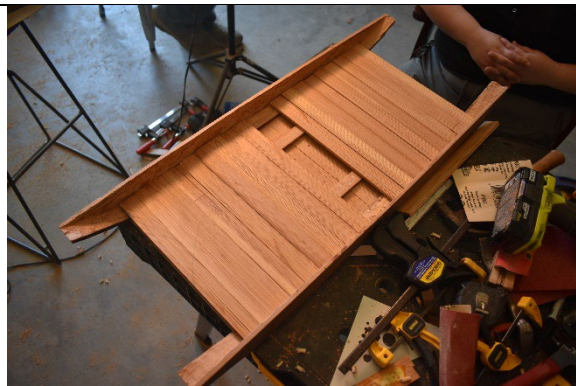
Interior planks being laid into flatboat, resting on chine-girder shelves and stringers (Photo by Michaela Hoots).
